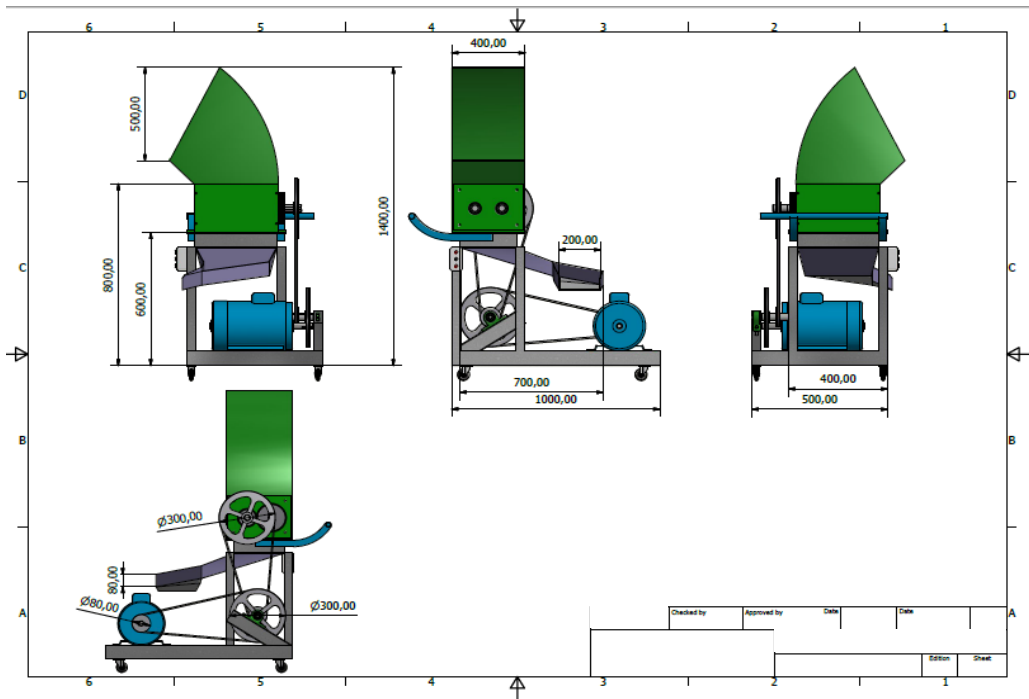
Dimensions of portable chopping plastic waste machine utilizing electric motor.
